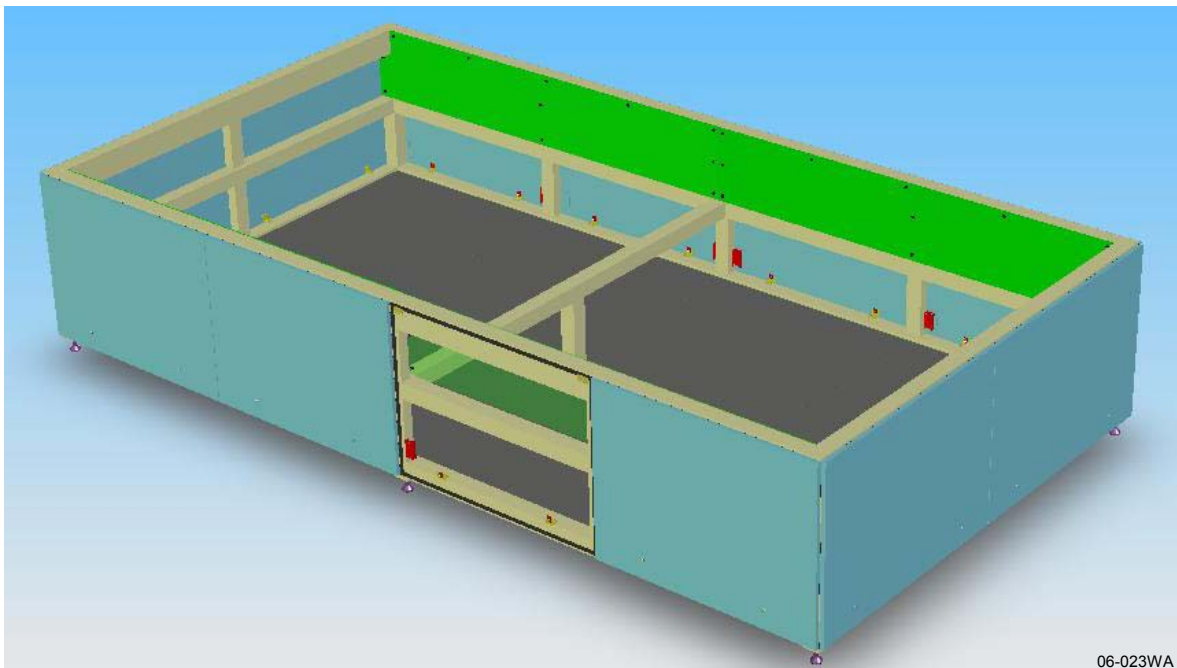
CAD model of cabinet assembly for 2 m x 4 m solar simulator, shown with one side panel removed.
